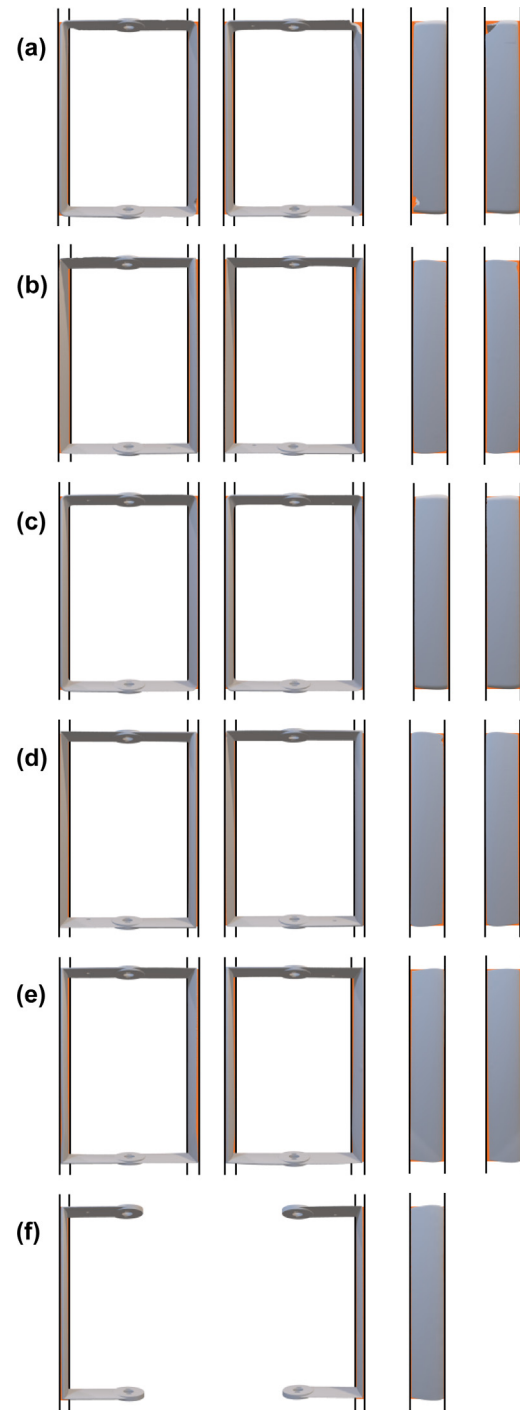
Front, back and side views of printed rotors. (a) GreyPro lofted-joint turbine. (b) GreyPro sharp-joint turbine. (c) Rigid10k lofted-joint turbine. (d) Rigid10k sharp-joint turbine. (e) Inconel sharp-joint turbine (f) Titanium single-bladed turbine. Deviance from the black vertical lines, highlighted in orange, signifies blade warping.
